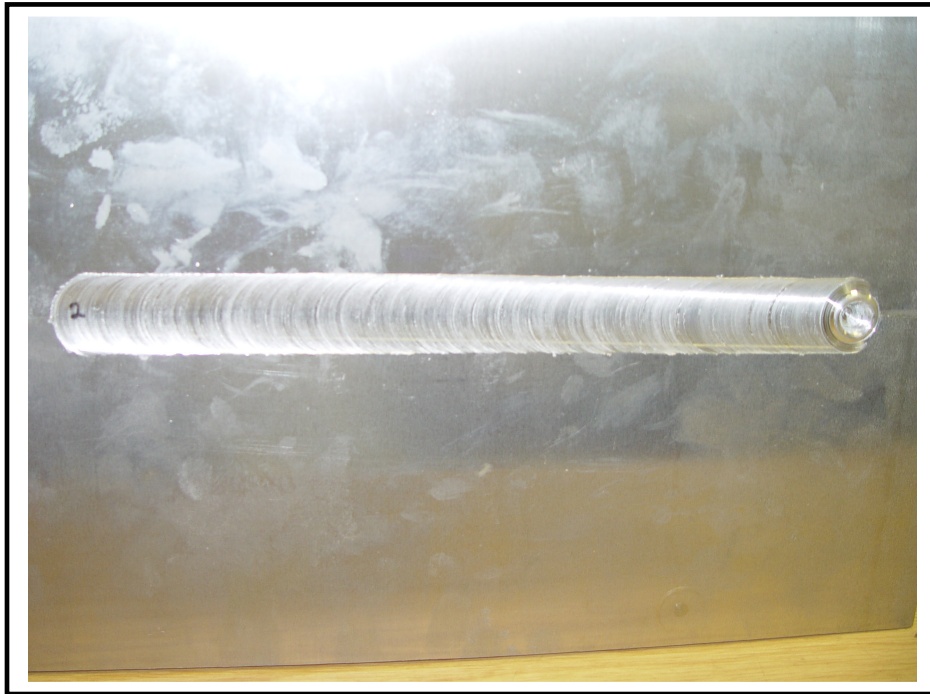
FSW-weld (2024 alloy and Tool 1).
